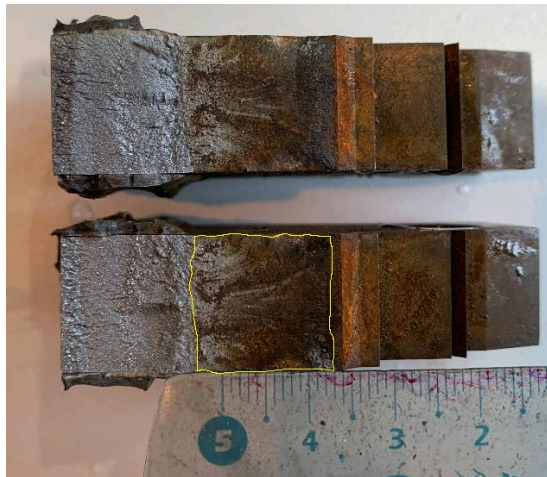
Fractography analysis on HAZ 7 after break-open
